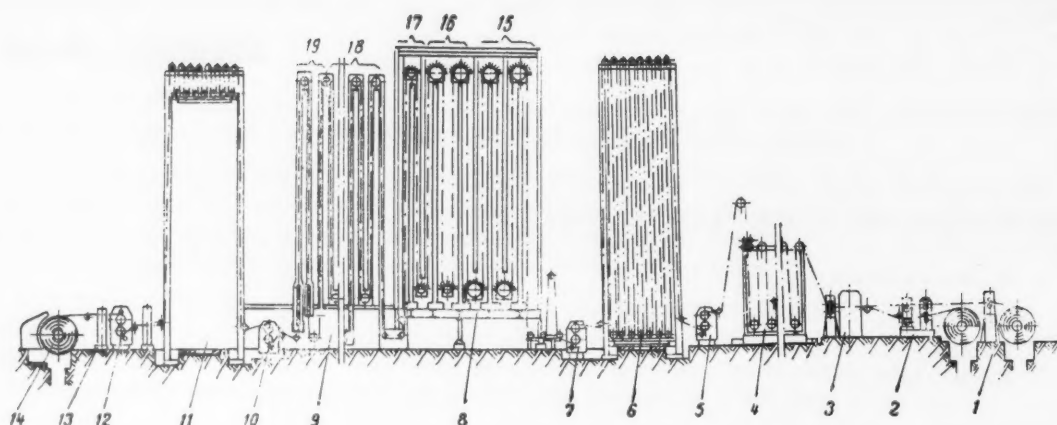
Diagram of the continuous annealing unit at the Velindre Works. 1) Decoiling station; 2) double-cut shears; 3) welding machine; 4) cleaning unit; 5), 7), 10), driving rolls; 6), 11), pilers; 8) furnace section; 9) cooling section; 12) pulling station; 13) shears; 14) coiling station; 15) heating zone; 16) soaking zone; 17) slow cooling zone; 18) rapid cooling zone (the strip length is 215 m); 19) final air-cooling zone (the strip length is 27 m).
